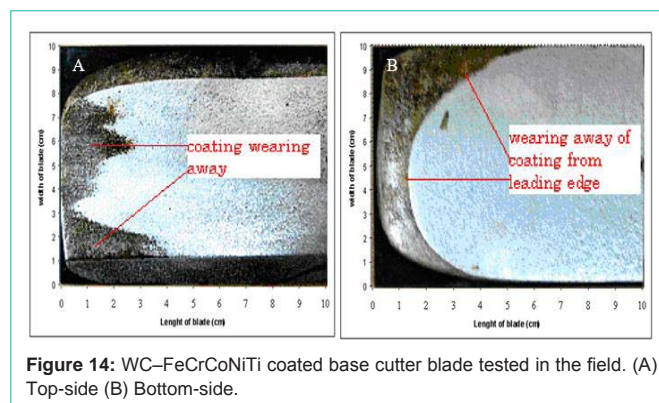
WC-FeCrCoNiTi coated base cutter blade tested in the field. (A) Top-side (B) Bottom-side.
